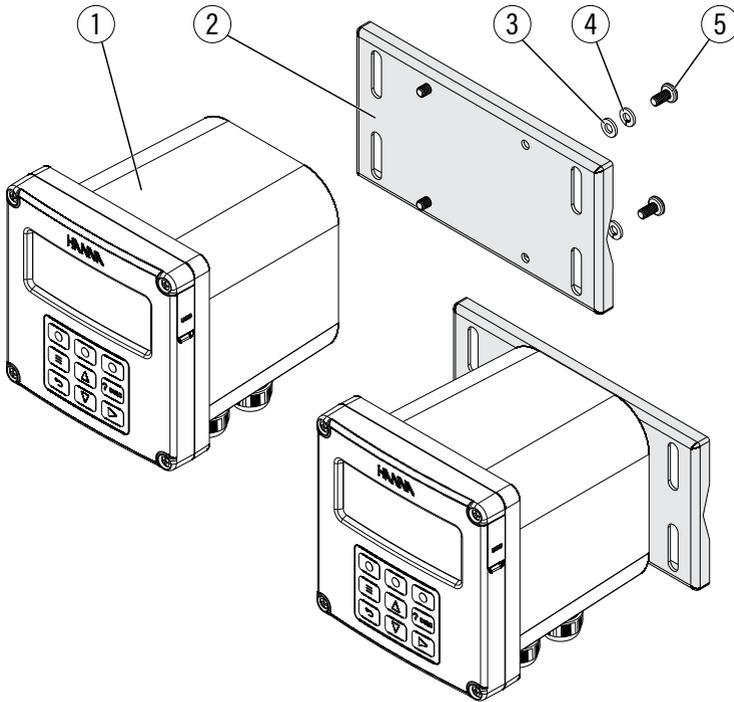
HI510 Controller Fastened to Wall-Mount Panel
